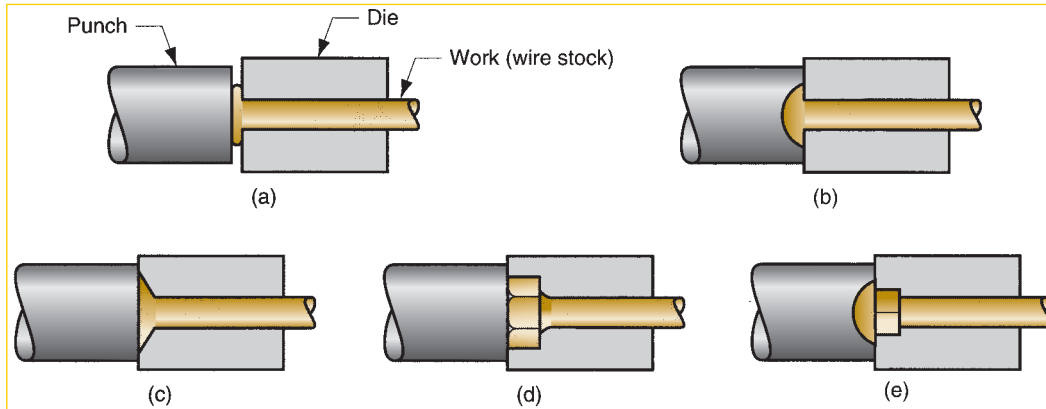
Examples of heading (upset forging) operations: (a) heading a nail using open dies, (b) round head formed by punch, (c) and (d) heads formed by die, and (e) carriage bolt head formed by punch and die.
